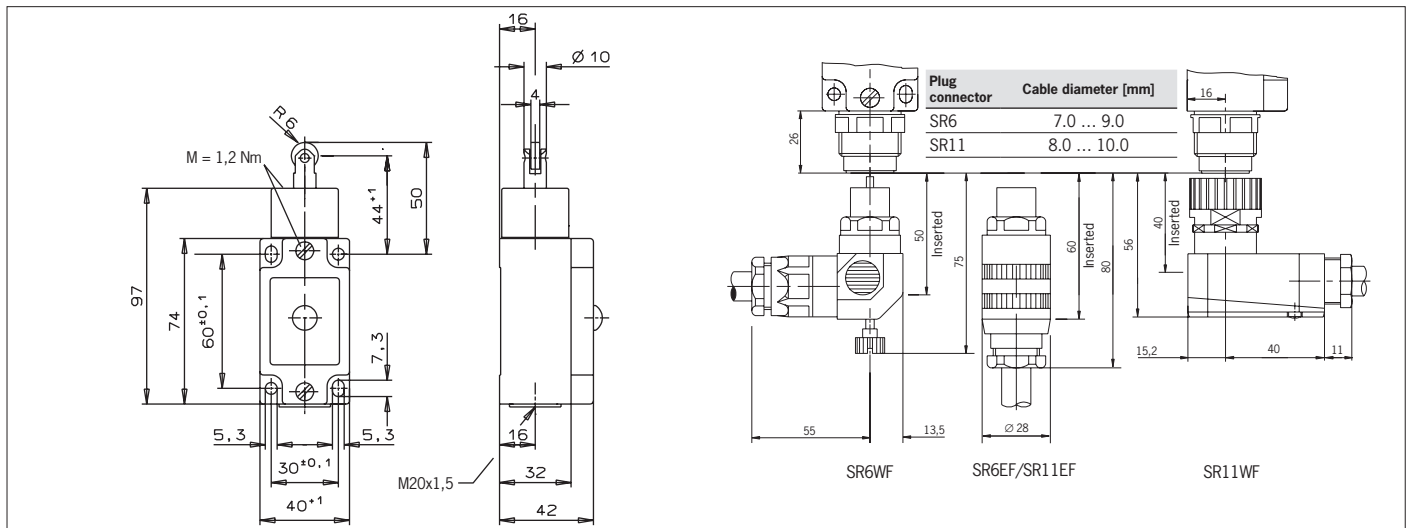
Dimension drawing of NZ1... with cable entry and NZ2... with plug connector
